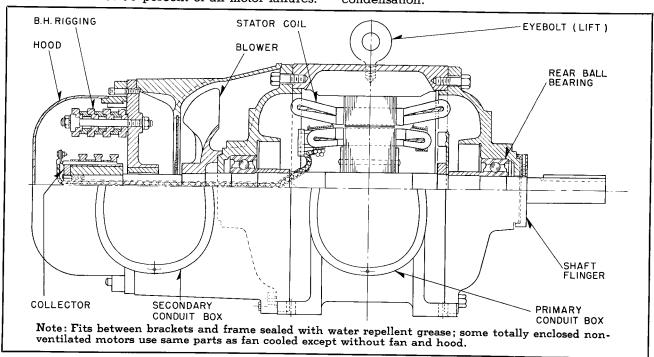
Arrangement of Parts—CWP or CIP Fan-Cooled Assemblies
